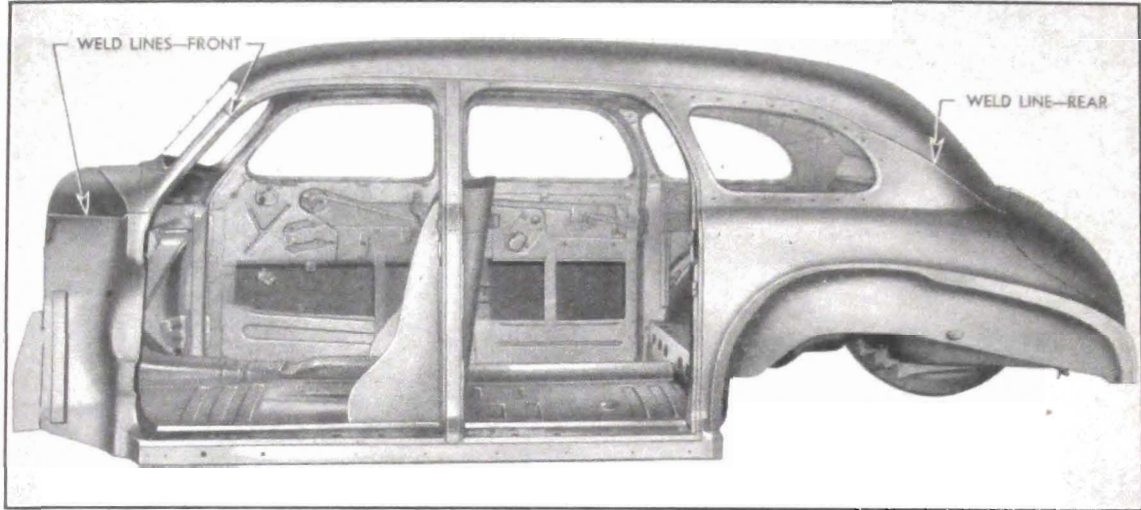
Sedan Body Showing Welding Lines—Series 90
